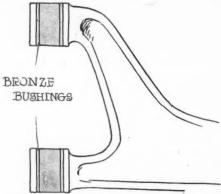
When the front wheels begin to wobble and the tires wear very rapidly, the trouble often is caused by excessive wear of the king pin or steering knuckle yoke. In such cases bronze bushings may be used effectively as shown above. This method is in use in a number of high-class service stations in Chicayo
